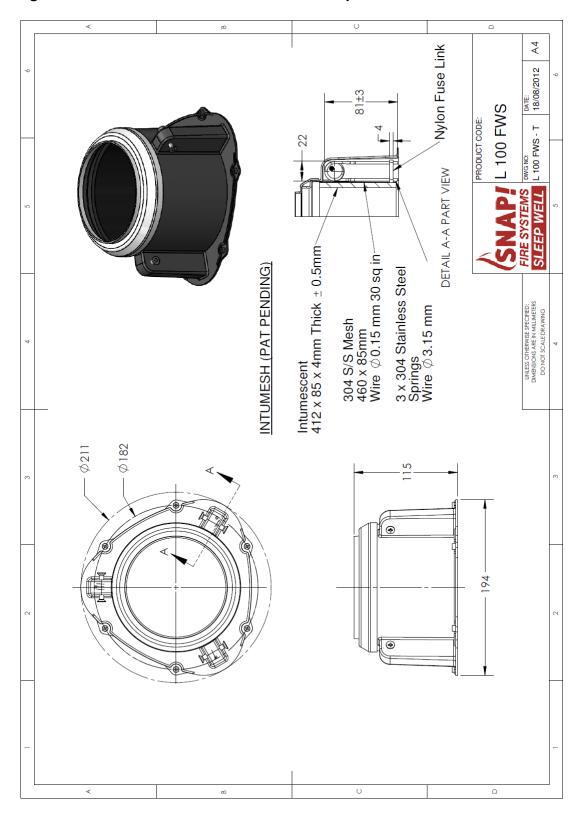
L100 FWS Cast-in Collar installed to specimen No. 6
